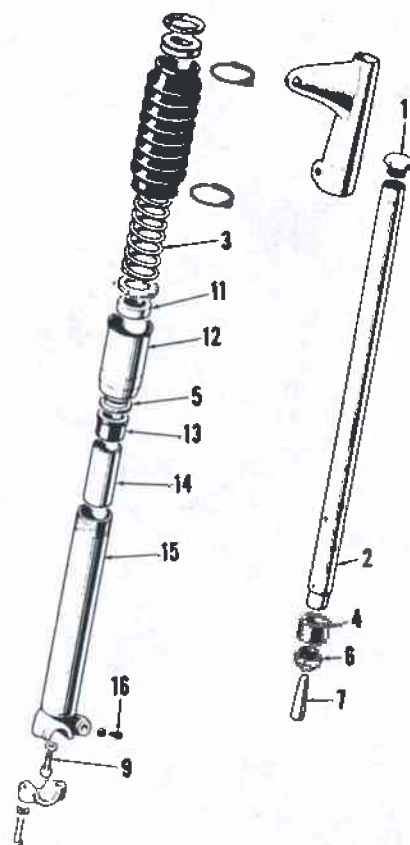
Exploded view of front suspension used from serial number DC5825 to DU66245. On some models, restrictor valve may be type shown in Fig. TM4-16. Refer to Fig. TM4-14 for legend.
